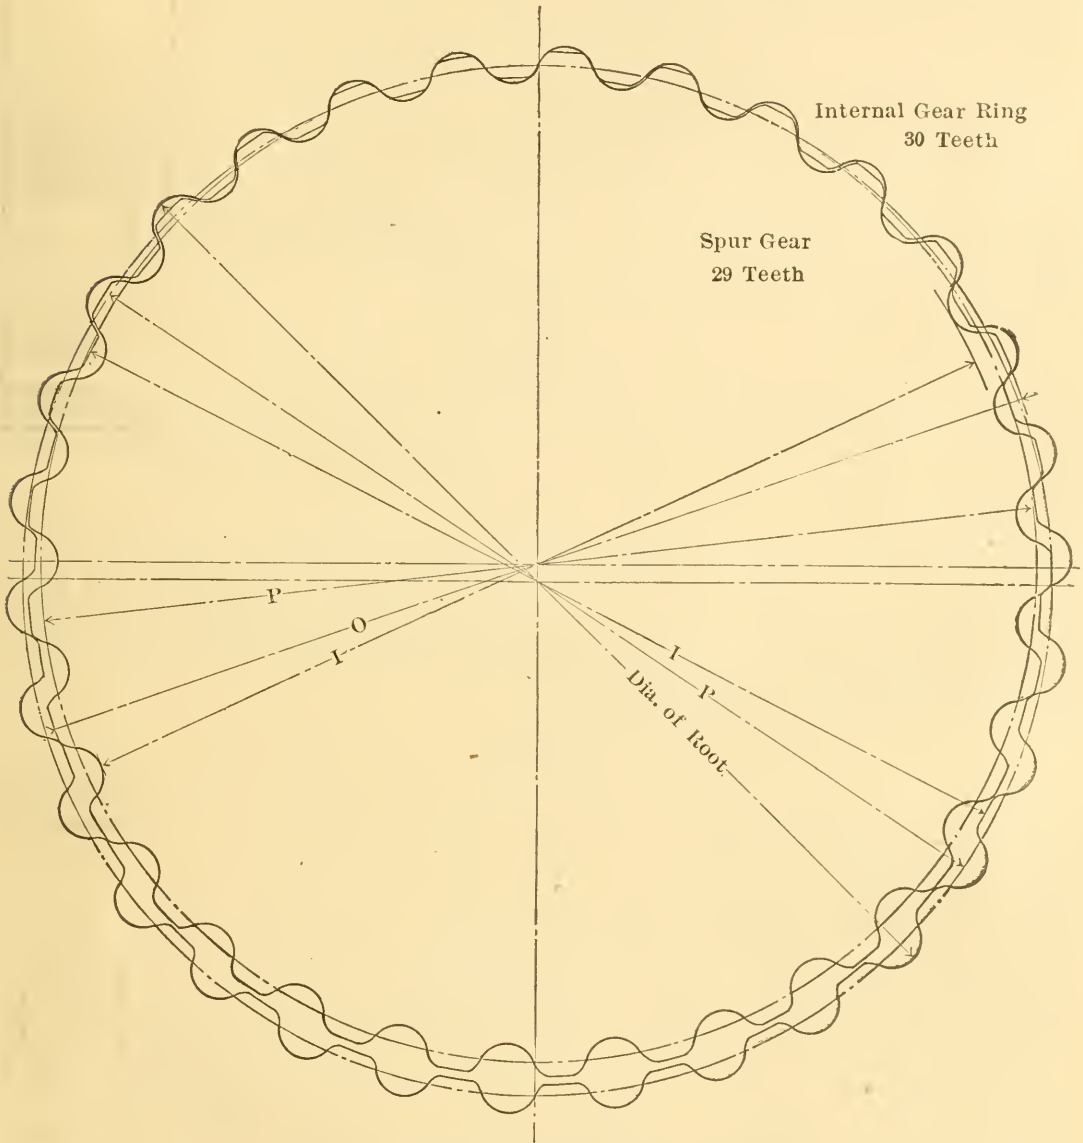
SPECIAL INTERNAL GEAR DRIVE.
